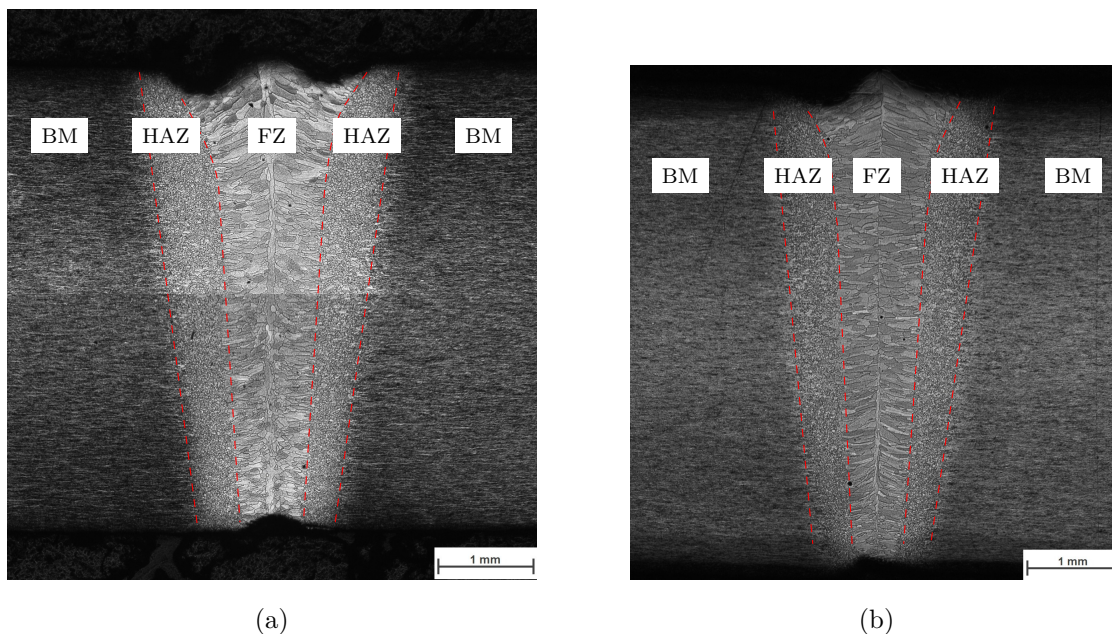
EB butt welds of 5 mm TZM sheet metal welded with (a) 43 mA and 30 mm/s and (b) 67 mA and 60 mm/s
